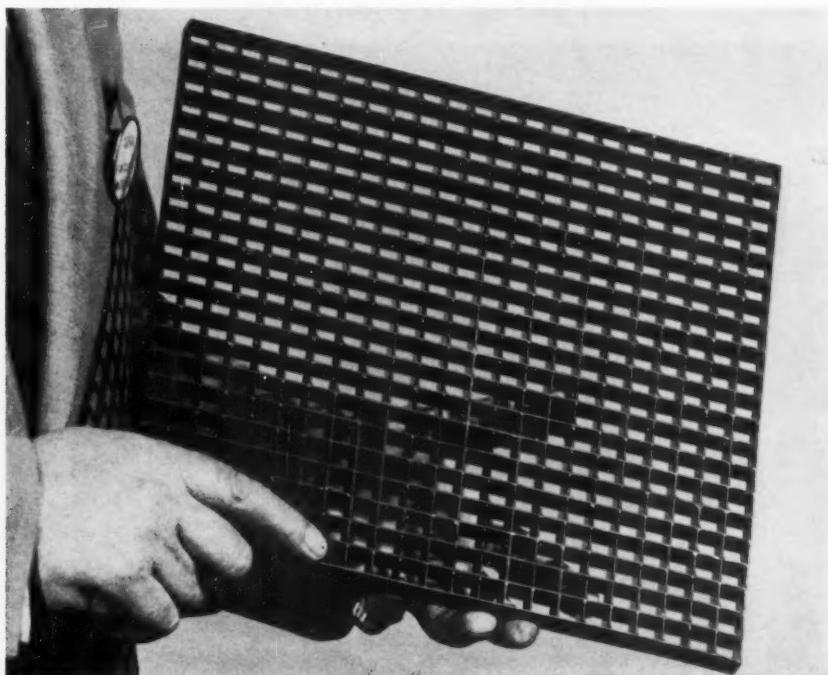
This complex grid has been produced from epoxy resin by a three-phase transition molding process. The parts are held to a tolerance of plus or minus 0.002 inch.
